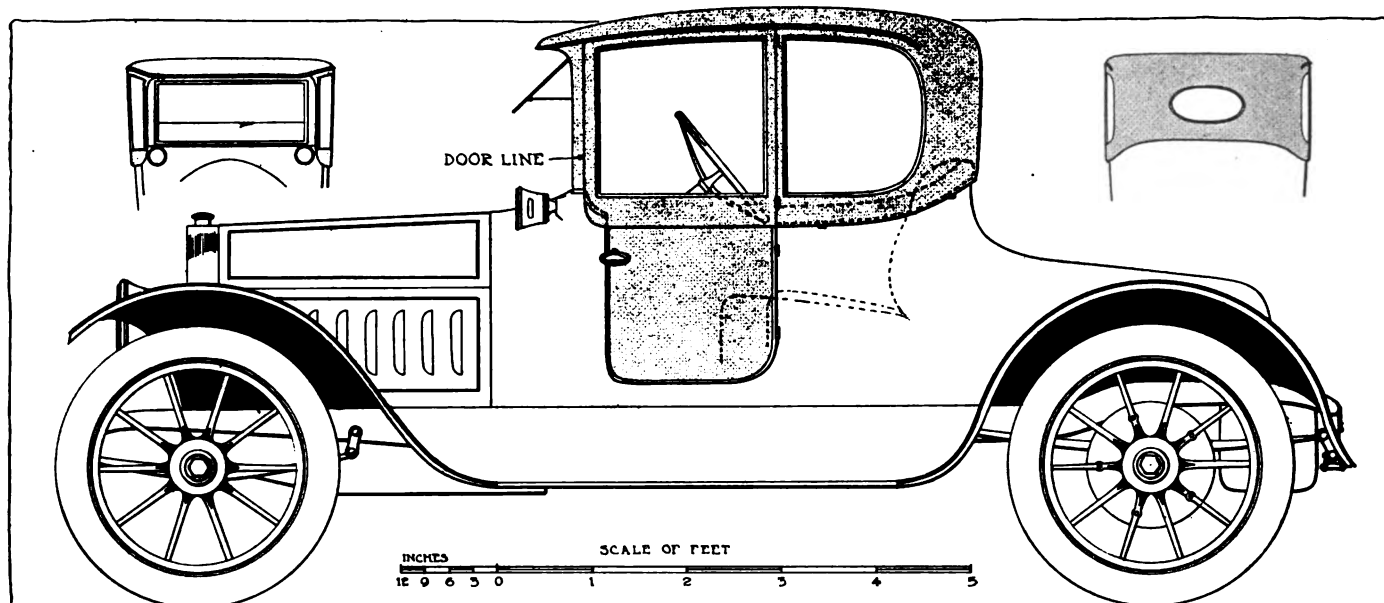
Special coupé fitted to 1914 Cadillac runabout. This may be removed without leaving any disfiguring marks
